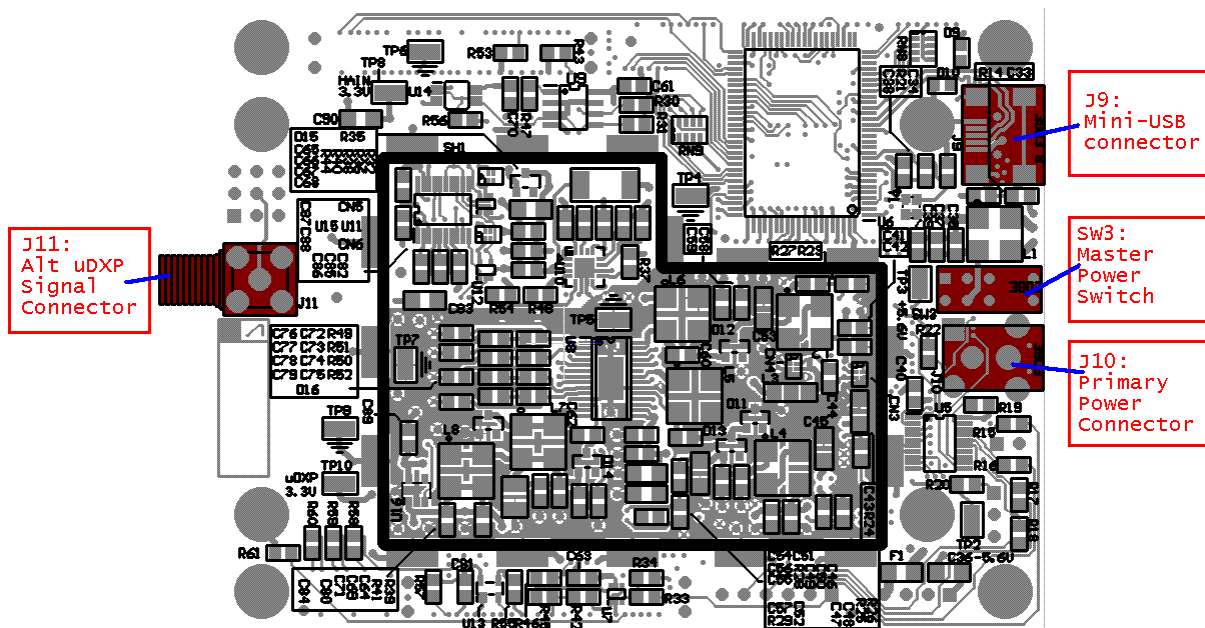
Locations of connectors and switches on bottom side of board. Note that an EMI shield covers much of the bottom side of the board. Customers are requested not to remove this shield.
